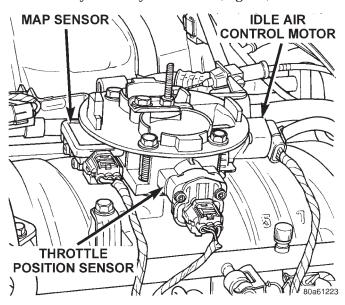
Sensor and IAC Motor Location—5.2L/5.9L Engines
